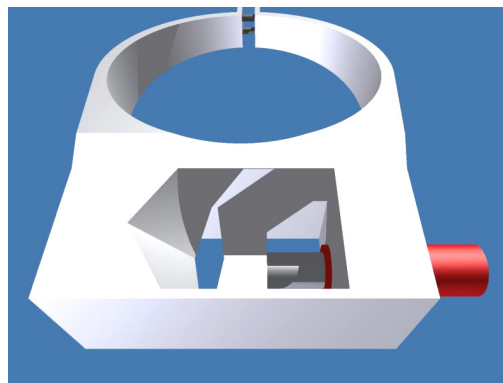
The actuator pushes the cutting block towards the adjacent cutting geometry, creating large shear forces which cut the umbilical.
